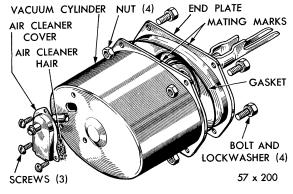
Removal of Air Cleaner and Vacuum Cylinder)
